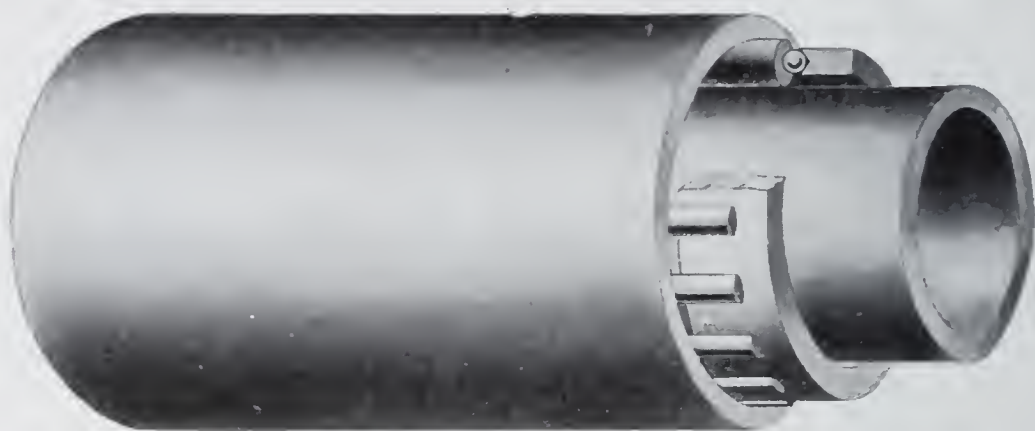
JOURNAL ROLLER BEARING WITH GROUND CASING AND SLEEVE.
